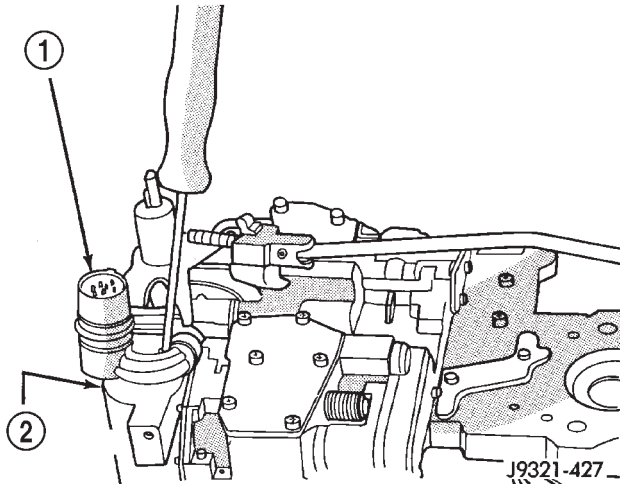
Solenoid Harness Case Connector Shoulder Bolt
